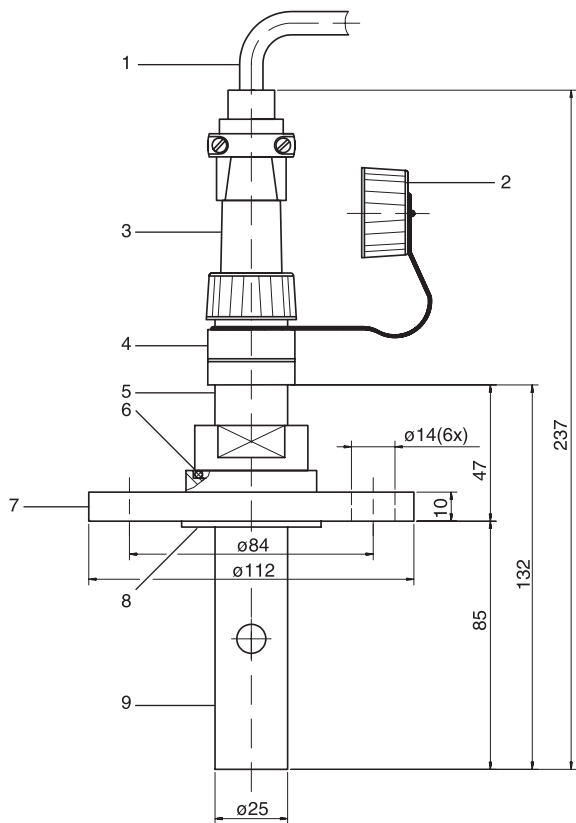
Dimension drawing SE 604 2-electrode sensor with installation dimensions (e.g. for flange)
